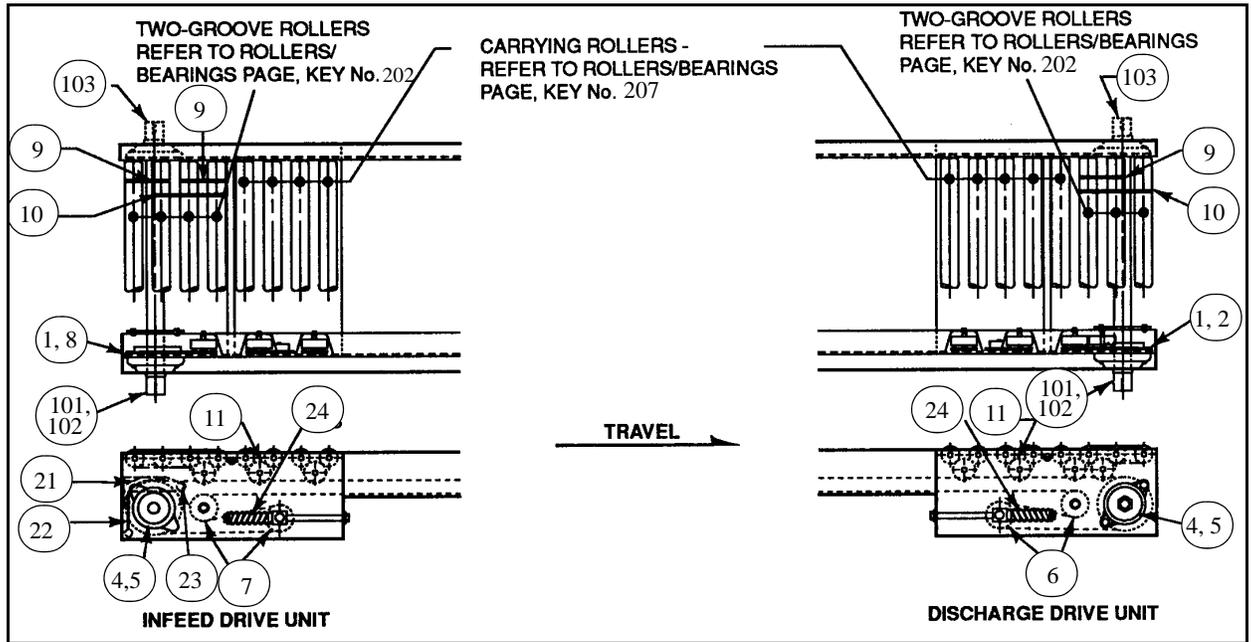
Infeed Drive Units and Discharge Drive Unit
